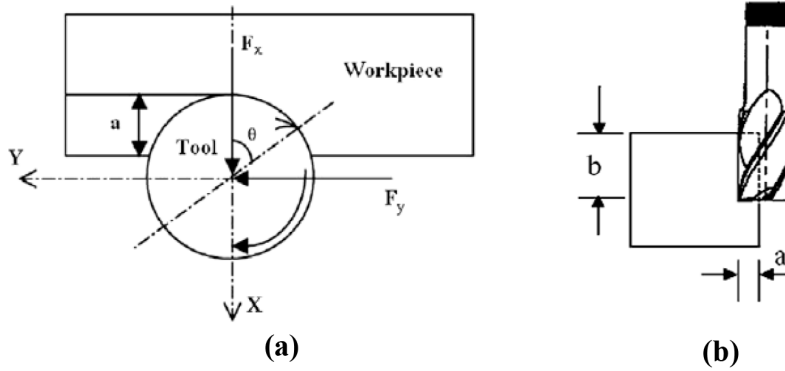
(a) Cutting mechanics, (b) axial and radial depth of cut.
